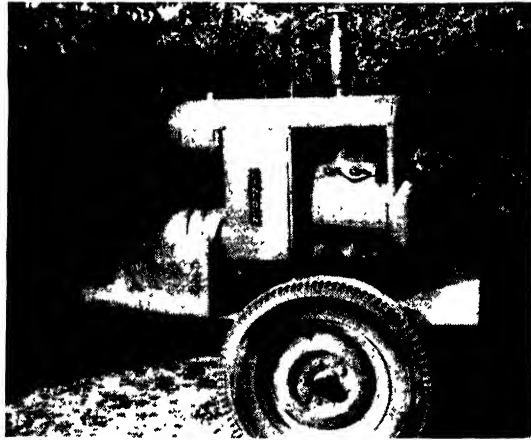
A portable engine-driven d-c welder may be used for welding away from the shop.
